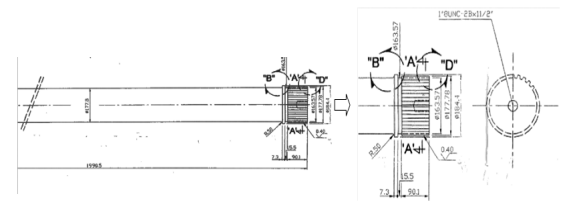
A recorded dimensional drawing of compressor gearbox quill (intermediate) shaft
